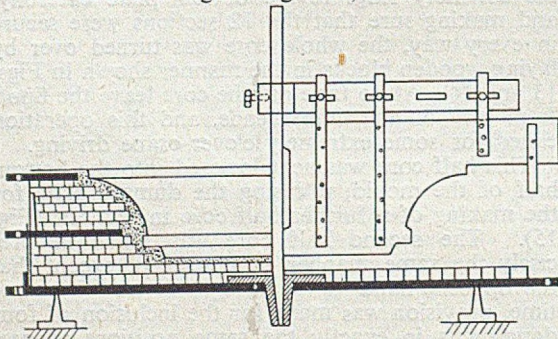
Foundation Plate and Strickle for the Bottom-half of the Impeller Mould.
